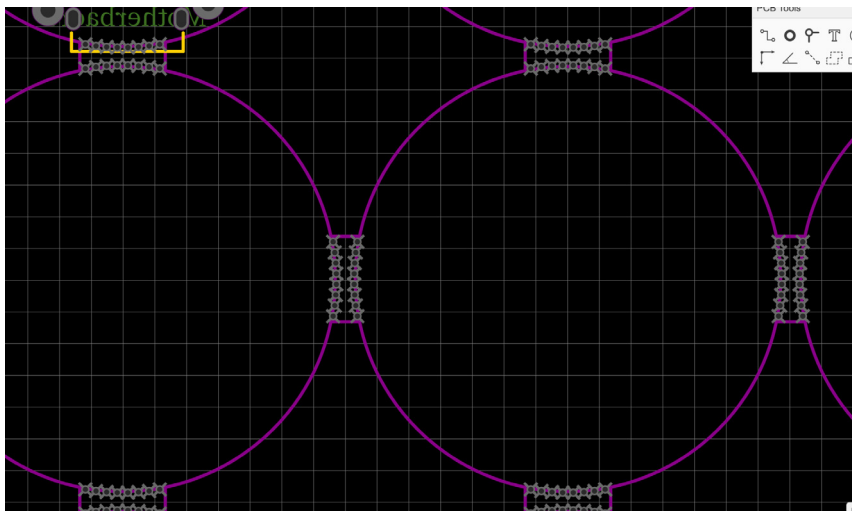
Stamp hole based separation for irregular shaped PCBs
